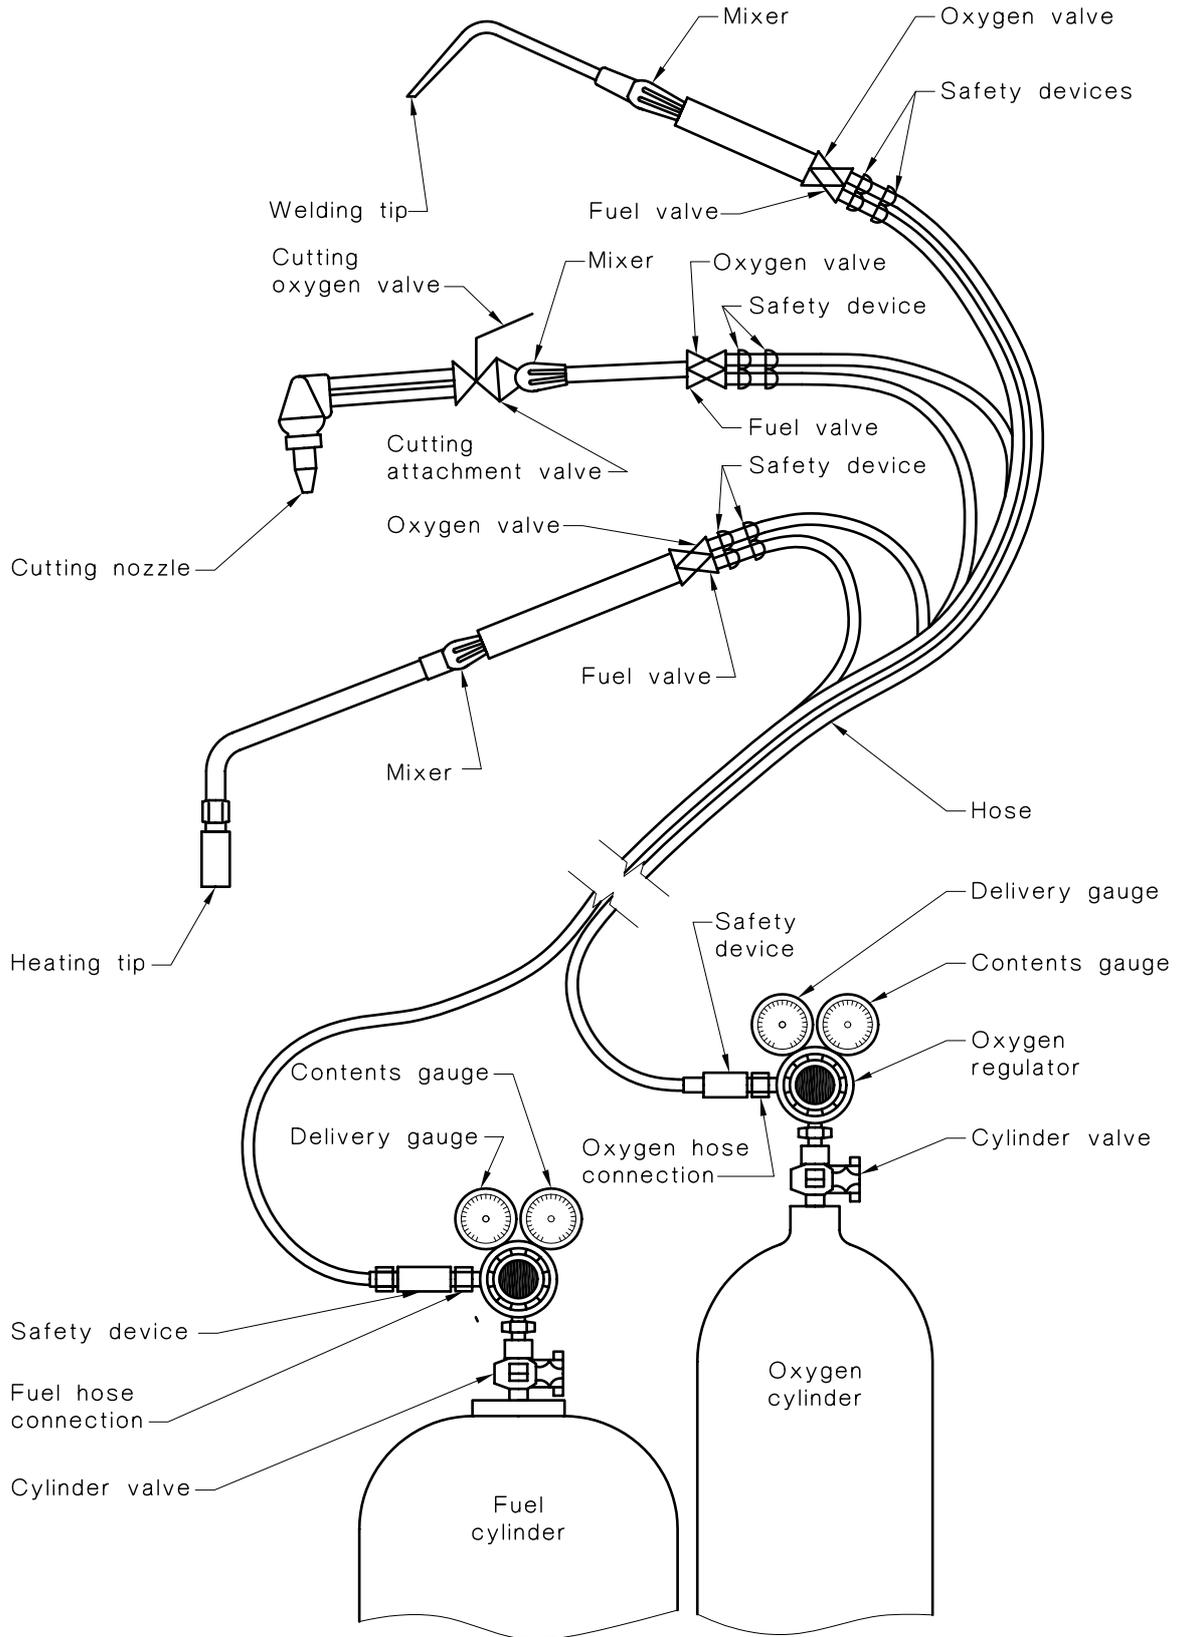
DIAGRAM OF TYPICAL OXY-FUEL WELDING, CUTTING AND HEATING SYSTEMS
